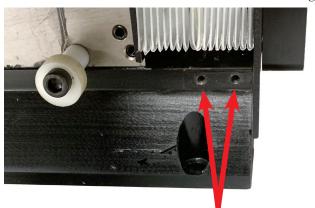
The red arrows indicate the 5-40 screw hole locations for the mill base, limit-switch mount.
